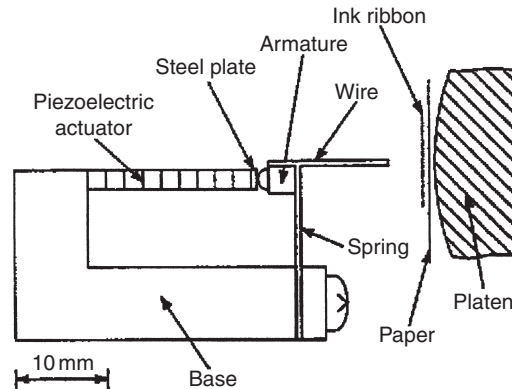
Dot-matrix printer head using a flight actuator mechanism.
